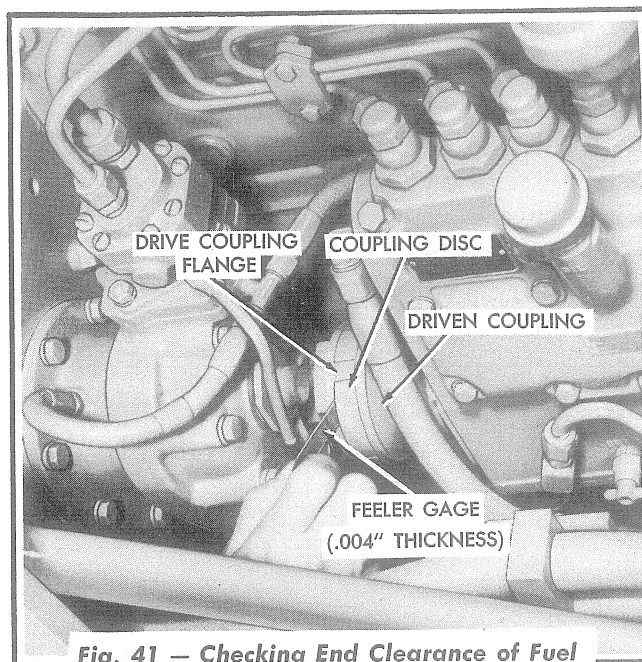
Checking End Clearance of Fuel Injection Pump Drive Coupling (Tractors Prior to Serial No. 4001)
